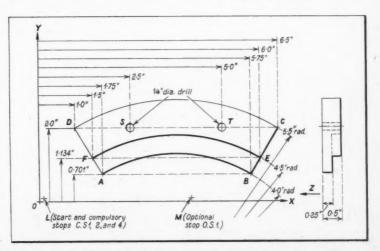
Typical workpiece showing the recommended method of setting out co-ordinate dimensions
